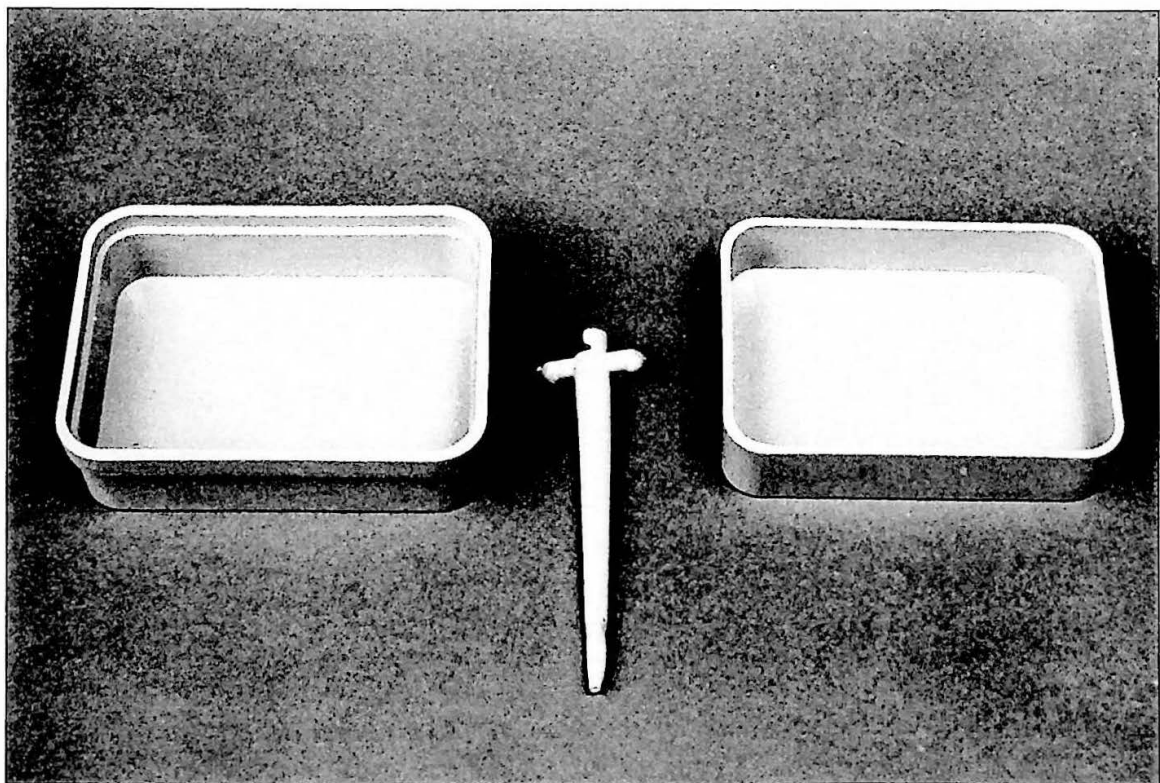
b Example of injection moulded container component (internal view) and sprue
